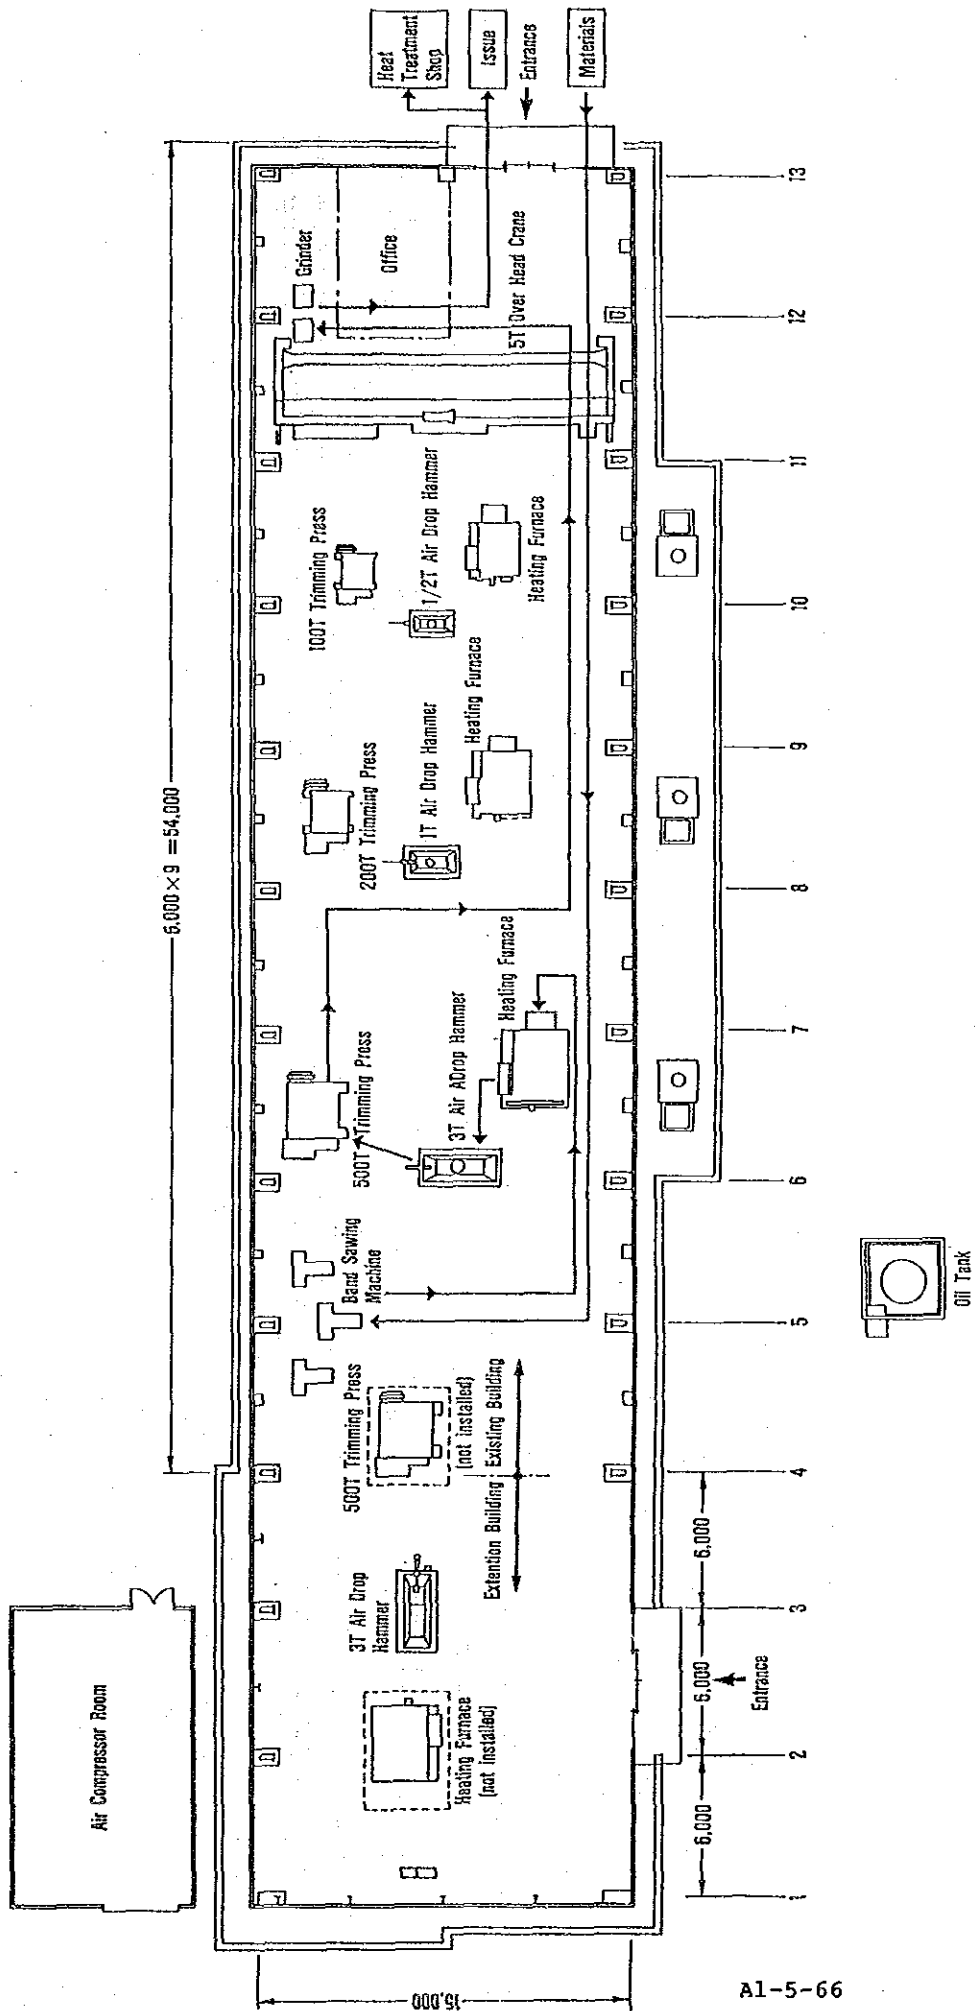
MACHINE LAYOUT PLAN OF HAND TOOL FORGHIG SHOP
